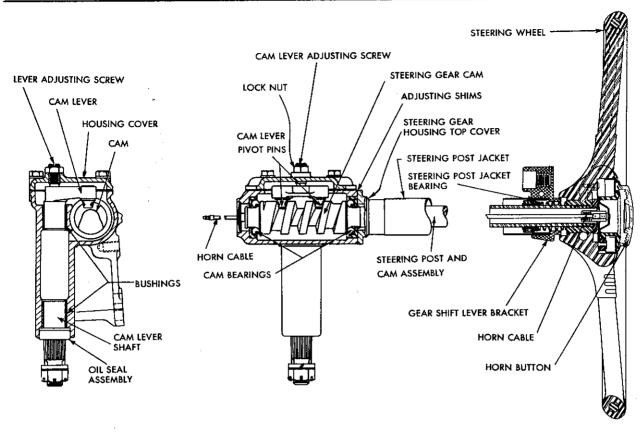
CONSTRUCTION OF THE STEERING GEAR ASSEMBLY
